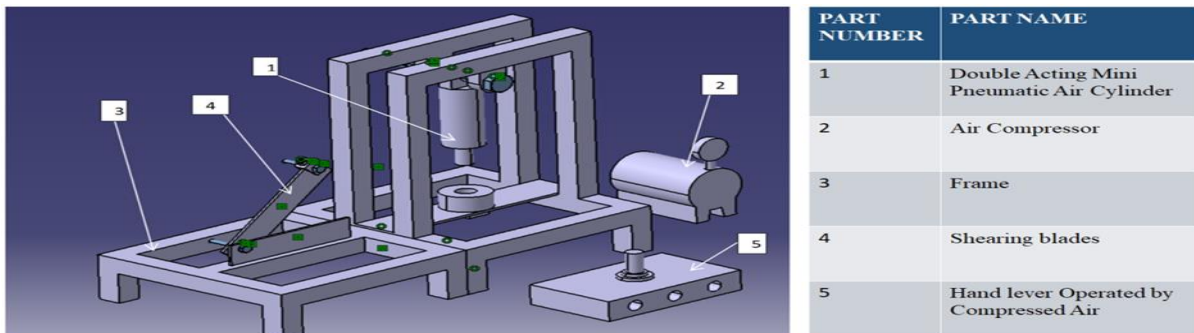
CATIA Modeling of Multipurpose Sheet Metal Processing Machine
